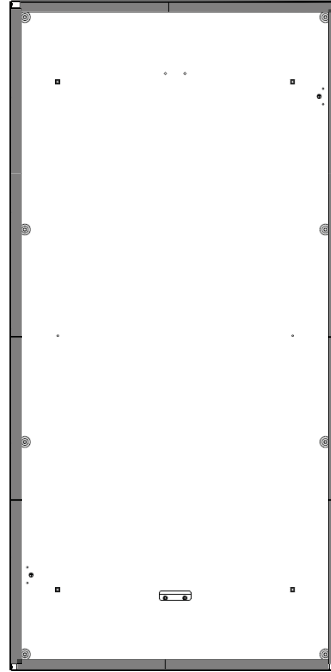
Placement details of enclosure screw barriers installed on the top and bottom plates of the I-Line™ enclosure.
